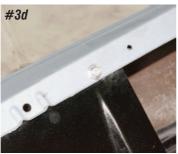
, 3b, 3c & 3d: The inner fender is attached to the outer fender with several sheet metal bolts. On a 1957 there is one bolt at the lower rear for the inner fender that bolts to the lower fender support. There is a bracket that is bolted to the inner lip of the outer fender and to the inner fender. At the edge of the fender, where the hood meets the fender, there are three sheet metal bolts. With all of these bolts removed the inner and outer fenders can be separated.
